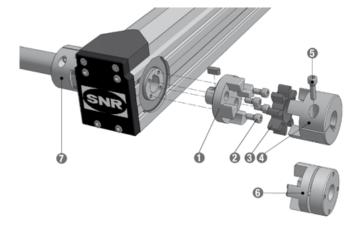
Mounting of couplings on Linear Axis with toothed belt drive
